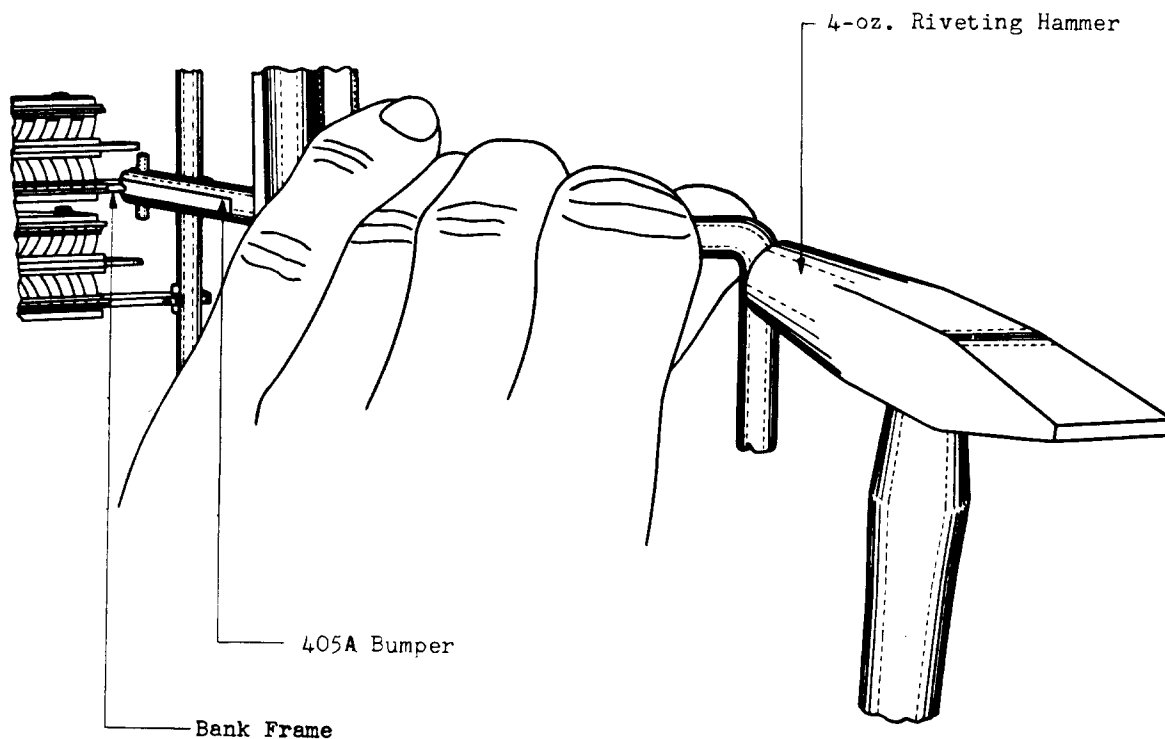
Adjusting for Plunger Tip and Bank Comb Tip Clearance
